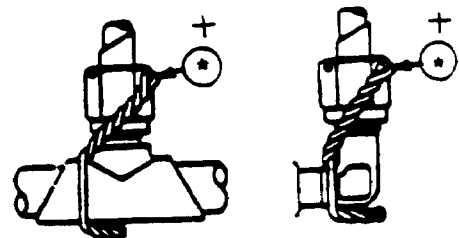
When no safety wire lug is provided, wire should be applied as shown with caution being exercised to insure that wire is wrapped tightly around the fitting.
